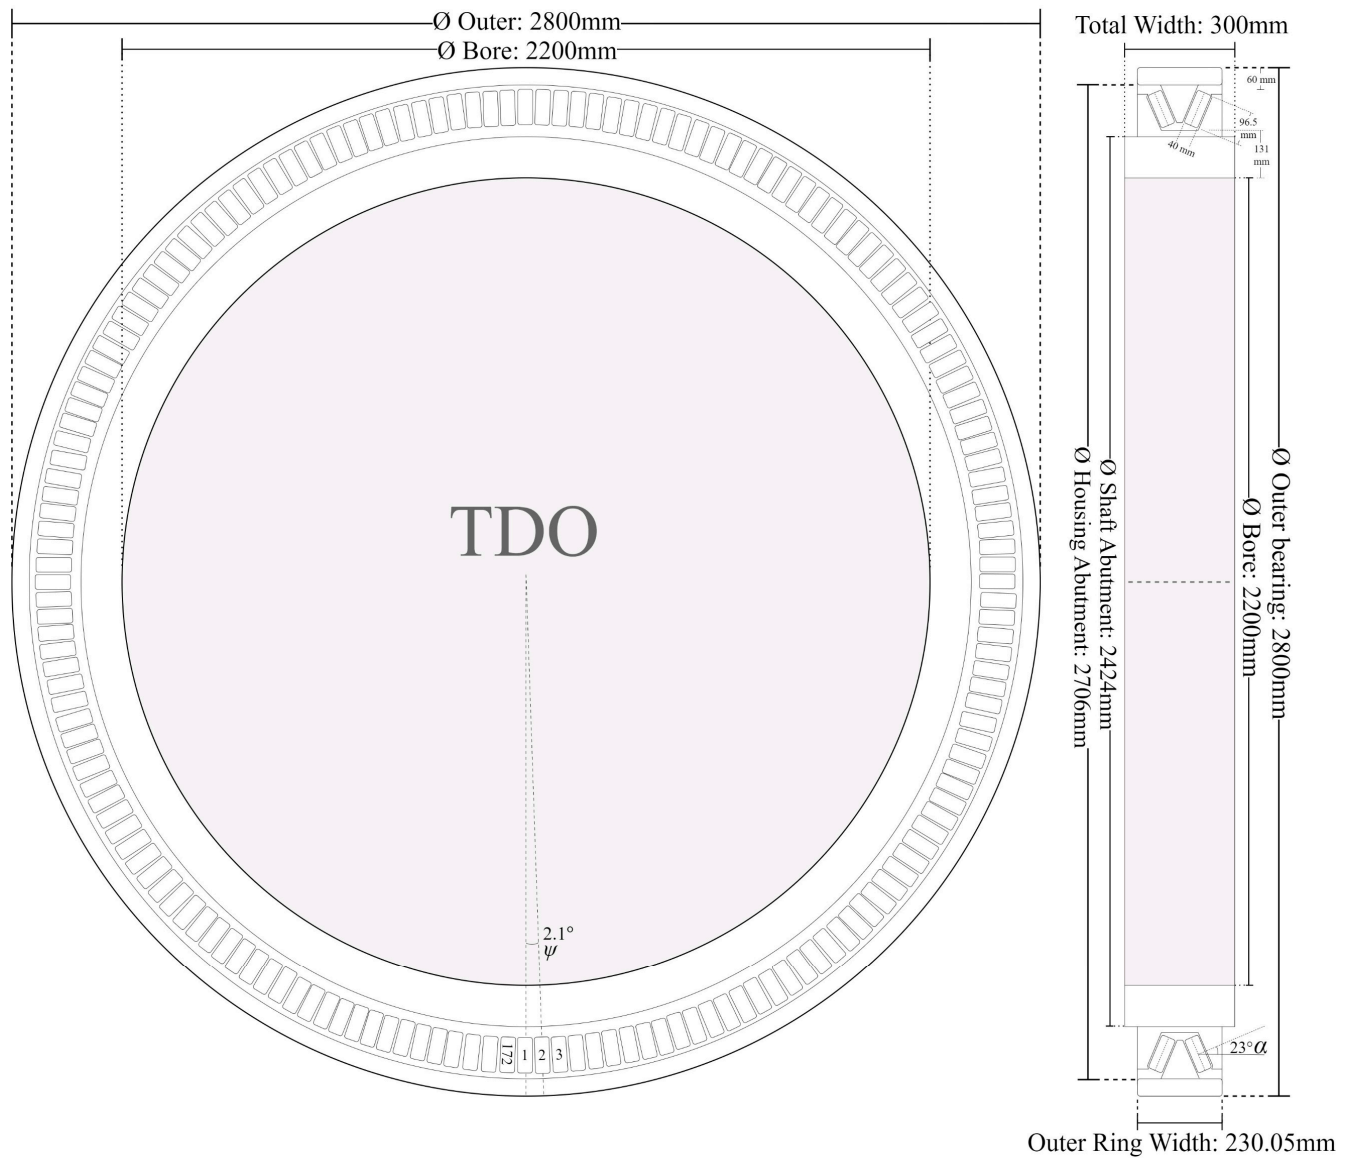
Technical drawing of Bearing 1—tapered double outer.
